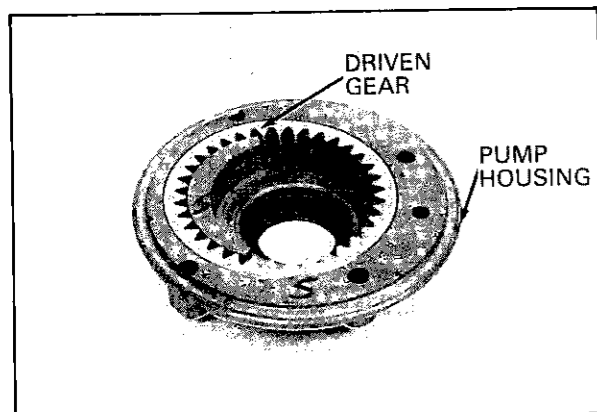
PUMP DRIVEN GEAR INSTALLATION
